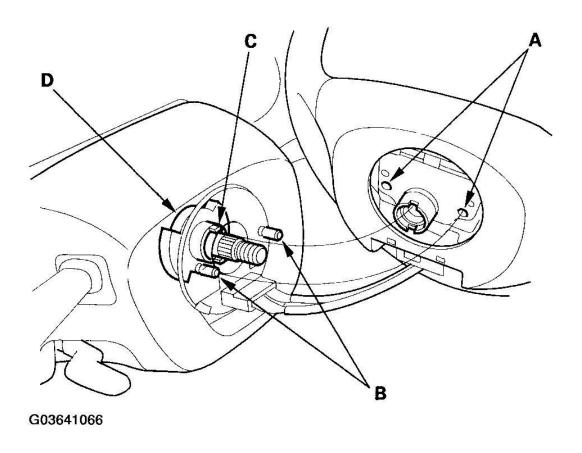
Installing Steering Wheel On To Steering Column Shaft Courtesy of AMERICAN HONDA MOTOR CO., INC.
